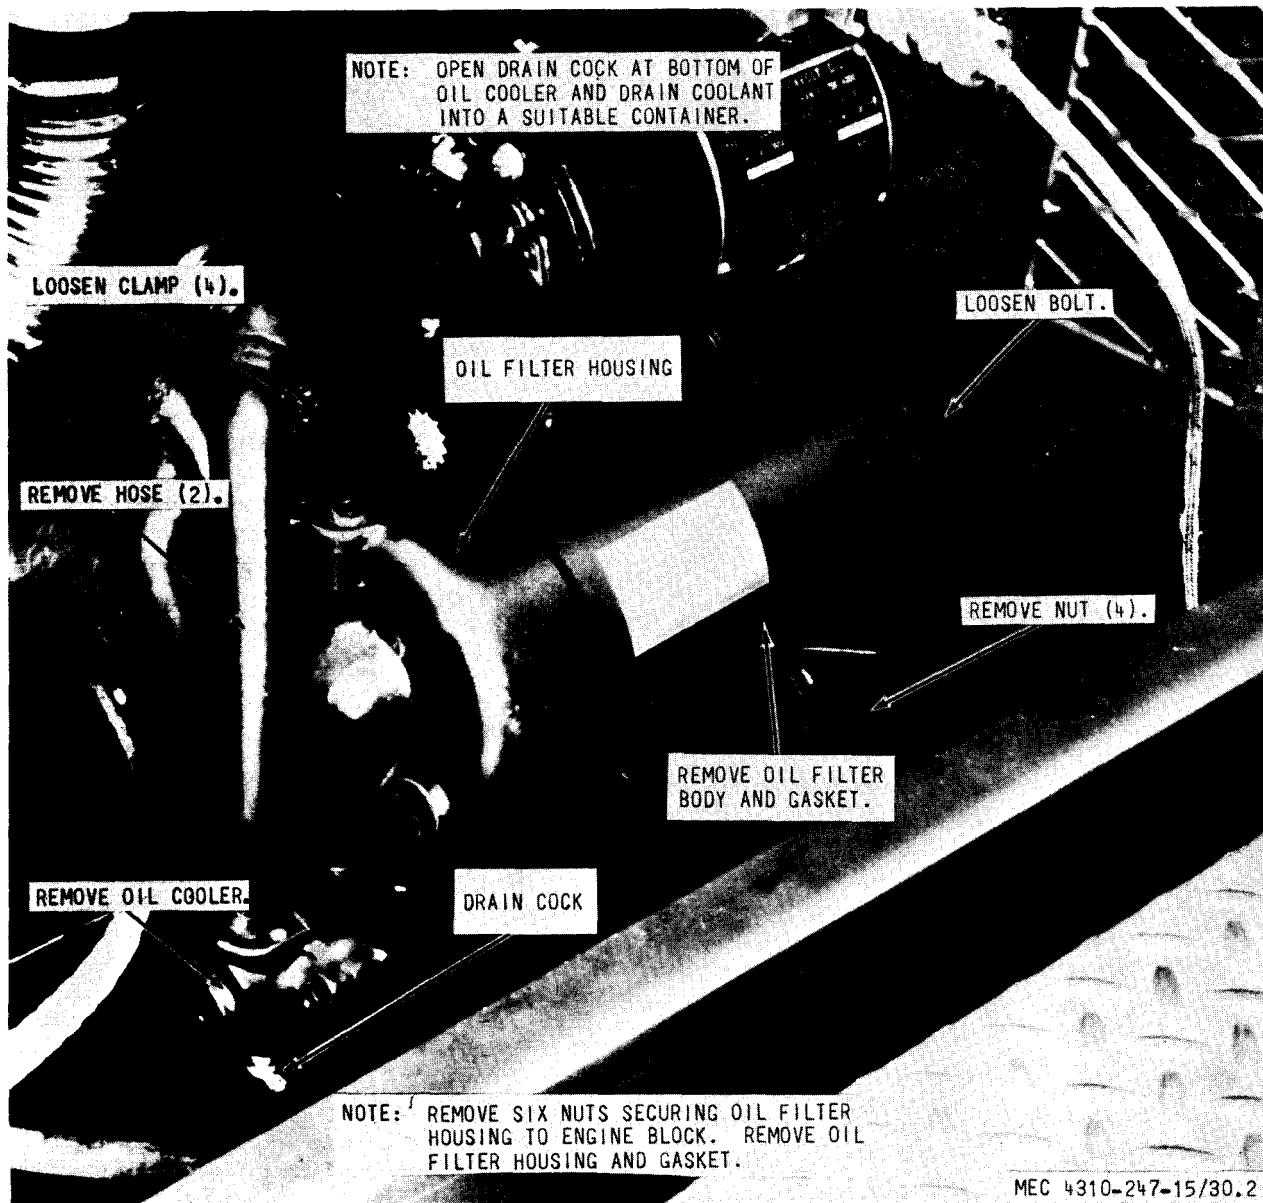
Engine oil cooler and oil filter removal and installation.
